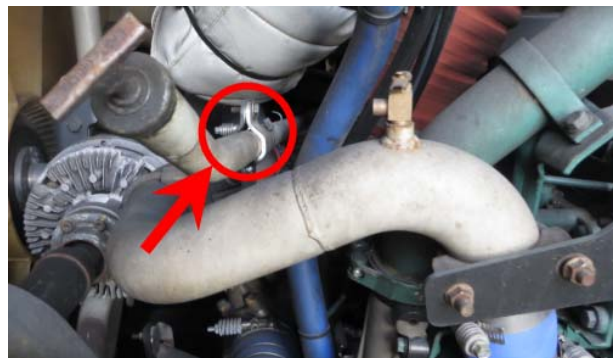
TRANSMISSION DIPSTICK TUBE CLAMP
